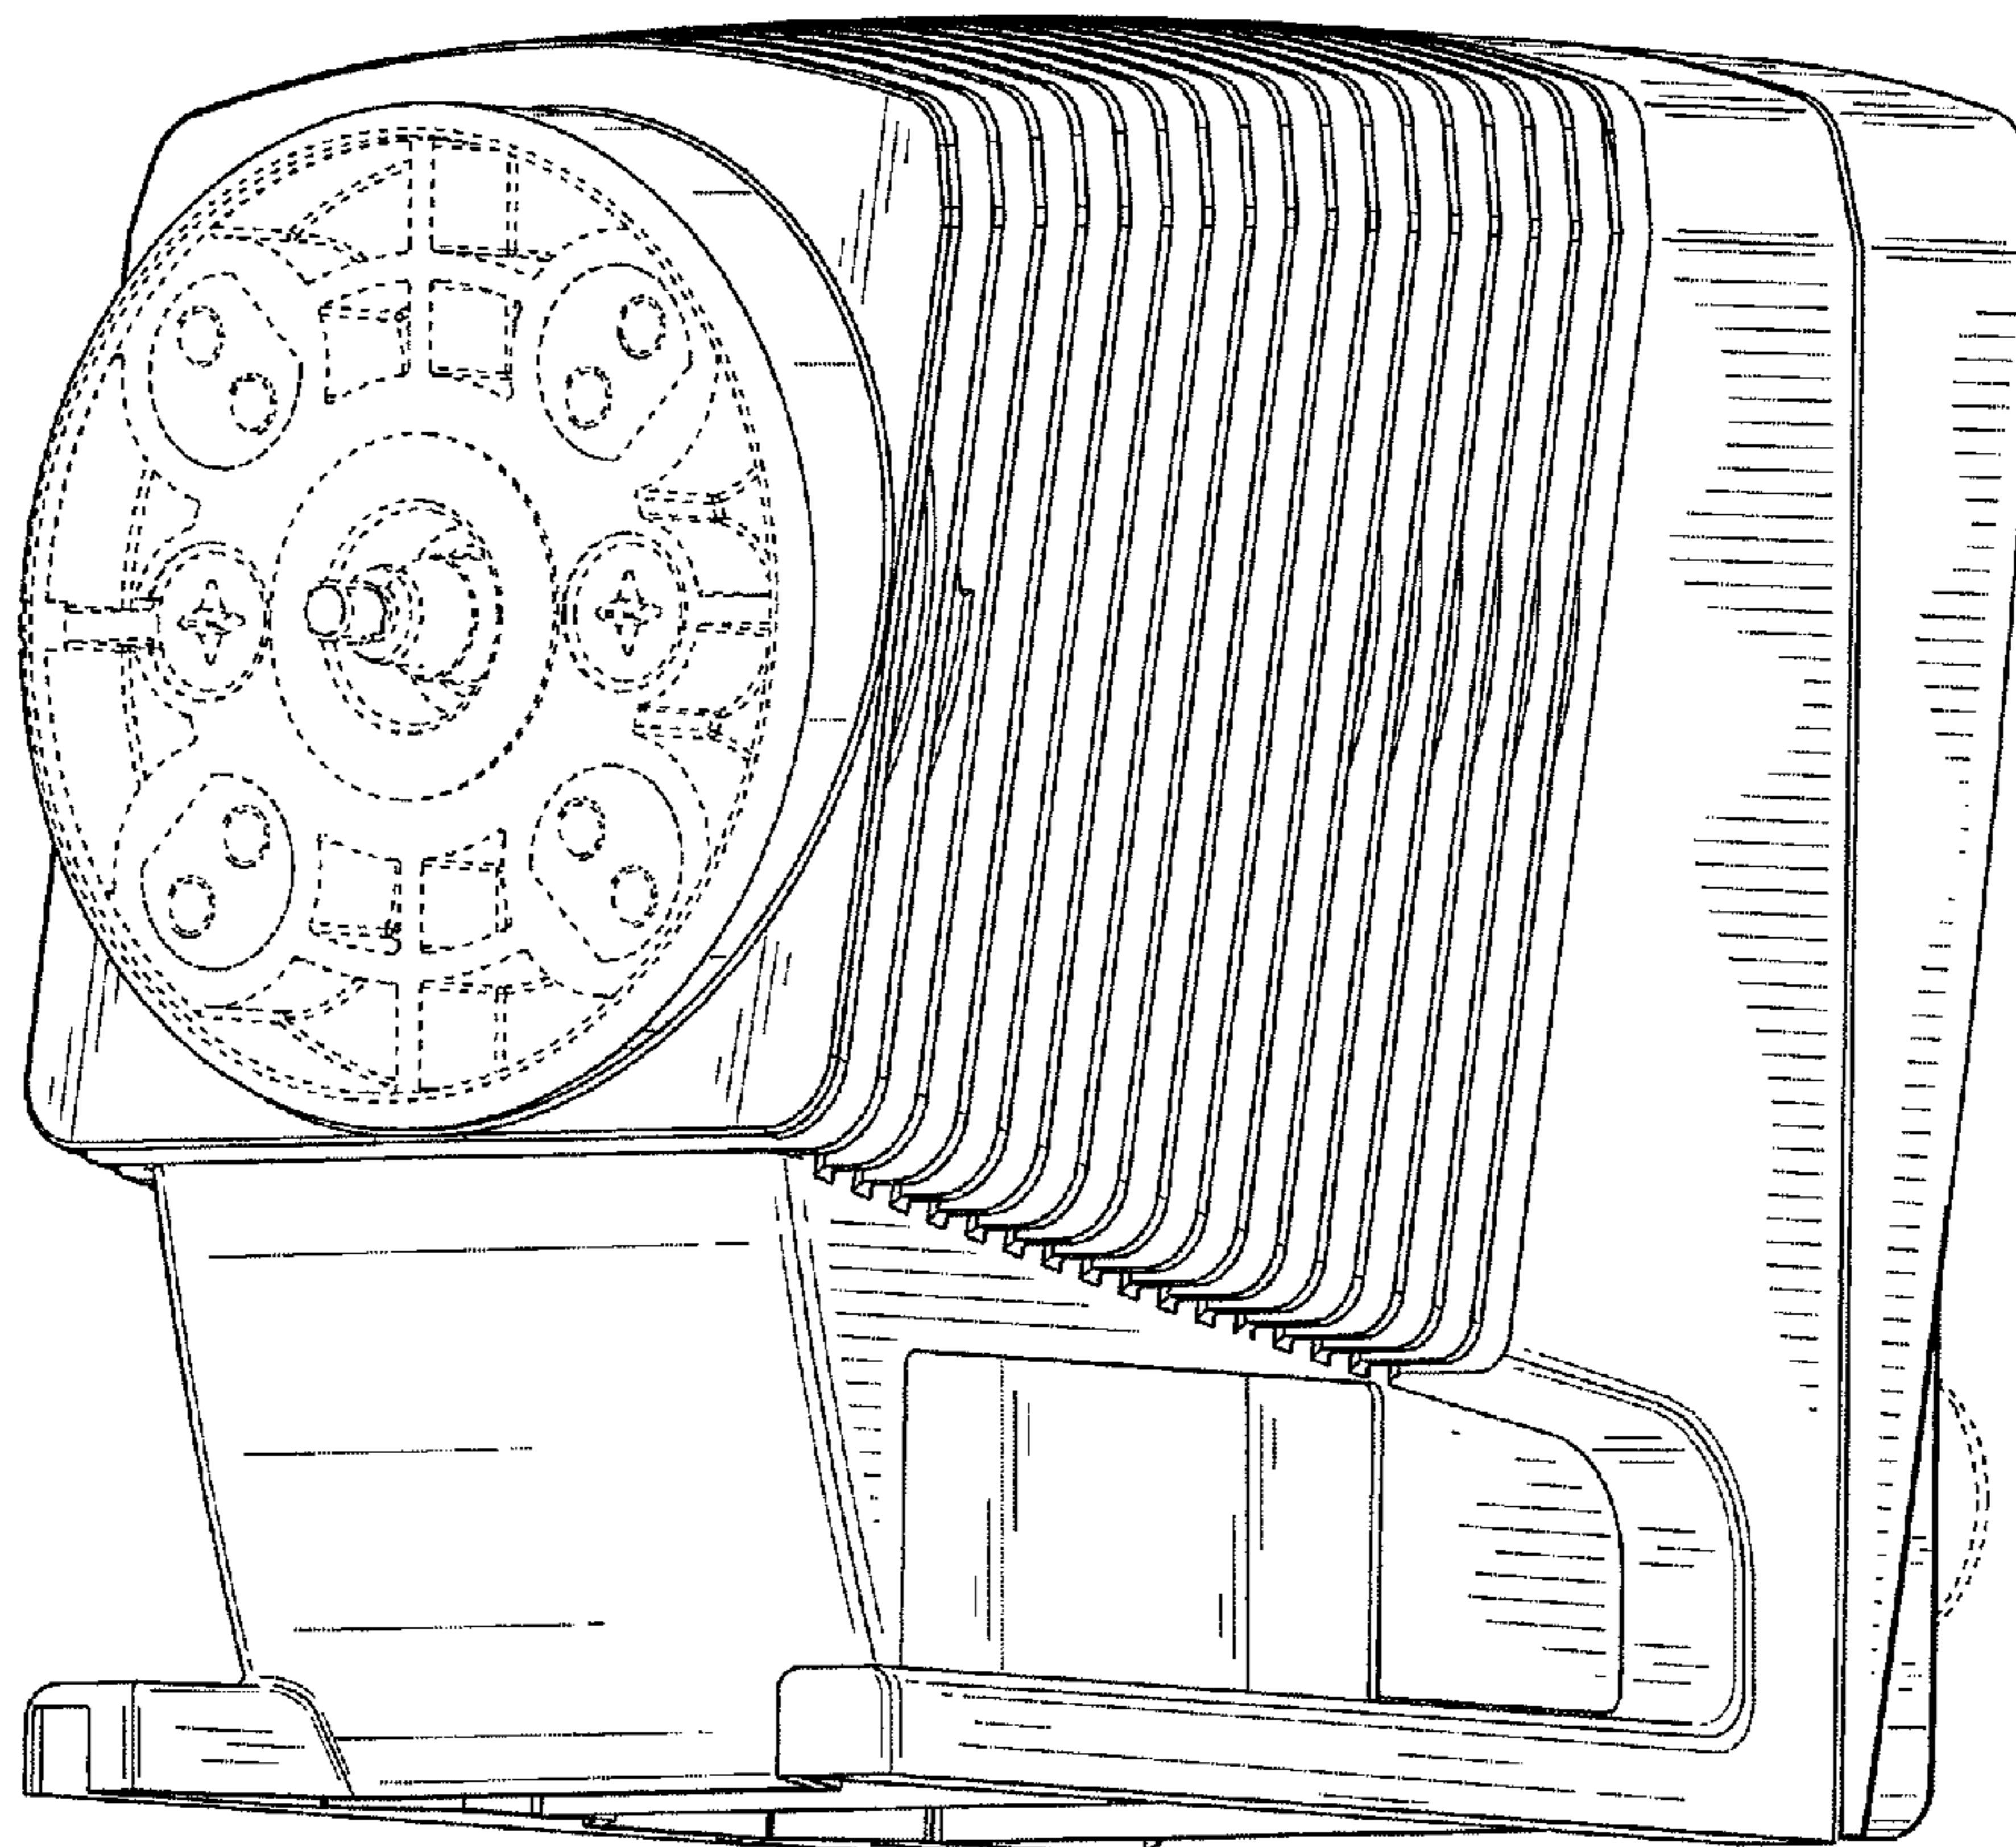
is a left side elevational view of the pump of FIG. 1, the right side elevational view being a mirror image thereof.
